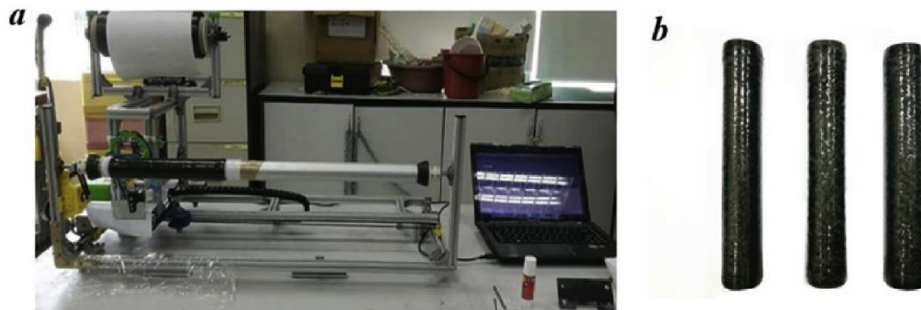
Equipment: (a) portable 3-axis winding machine; (b) filament wound carbon reinforced plastic tubes [60].
